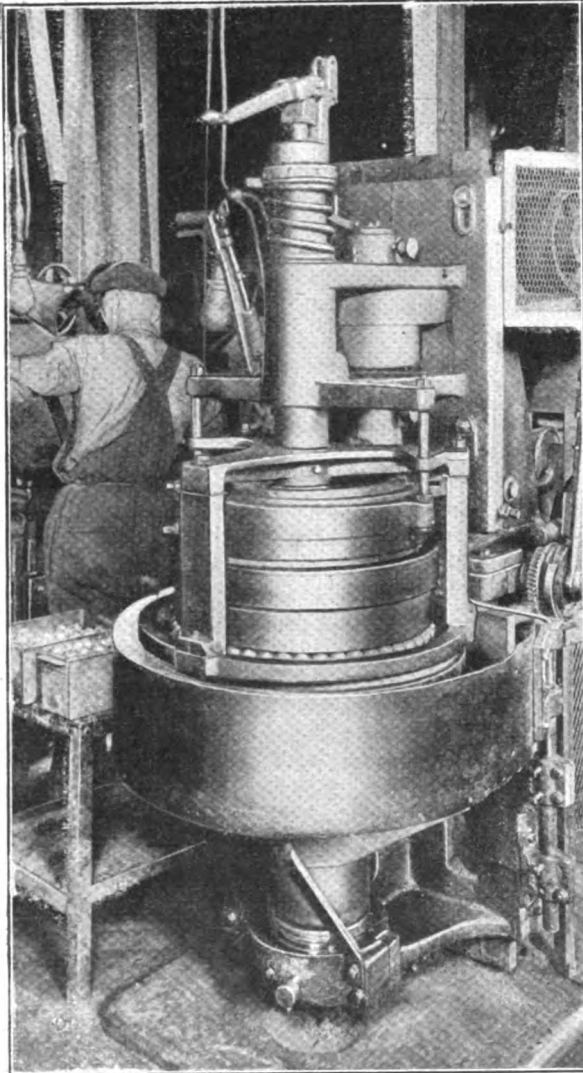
ROUGH GRINDING MACHINE (VERTICAL)
